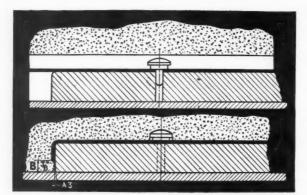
Method of forming simple flanges showing (above) before and (below) after forming.
